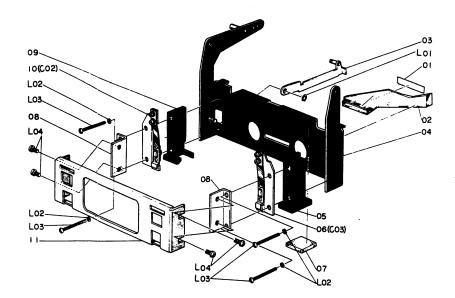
10.12. Brake Arm Assembly (B08)
